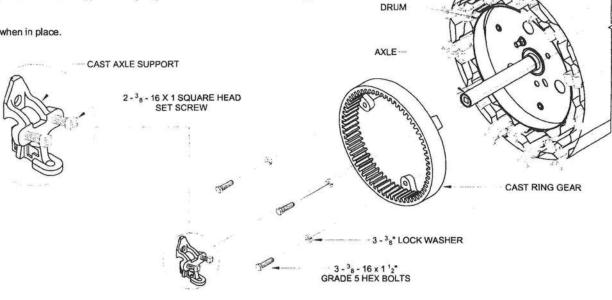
CAST AXLE SUPPORT AND CAST RING GEAR TO DRUM ASSEMBLY
